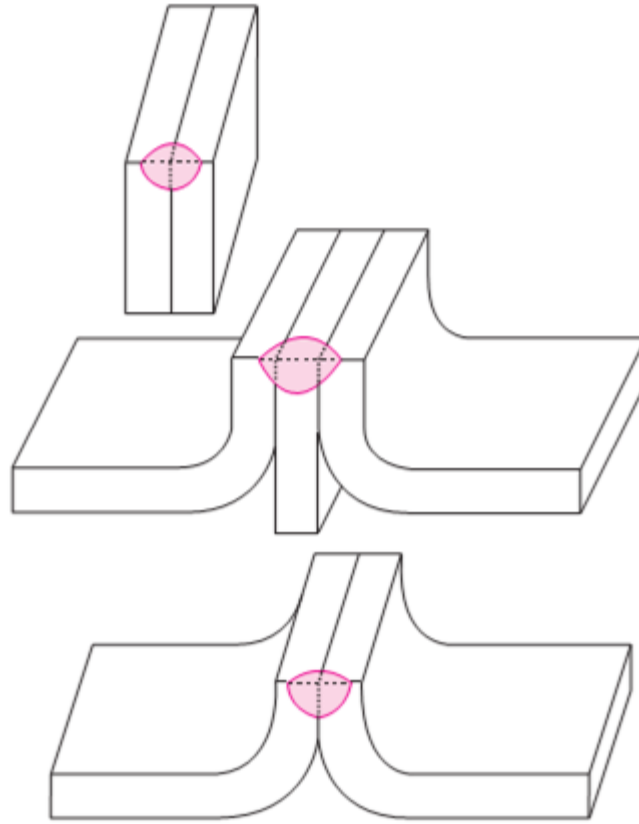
Common edge weld design that maybe used in fabrication
